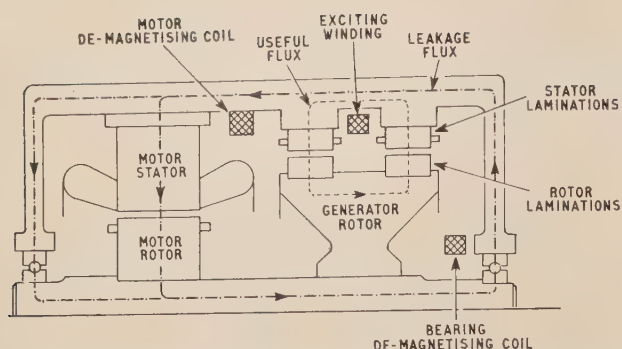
In homopolar alternators the stator is built in two parts with the excitation winding between them, and in many cases the machine is in a common frame with its driving motor
